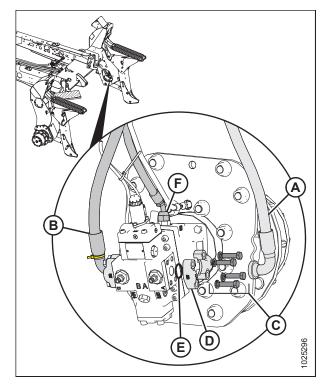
Left Wheel Motor Hydraulic Hoses
